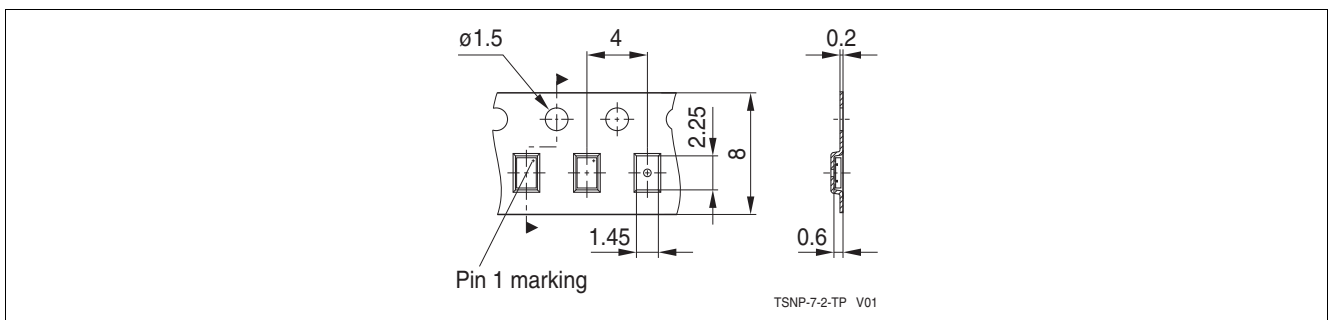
Tape & Reel Dimensions TSNP-7-2 (Ø reel 180, pieces/reel 6000)
